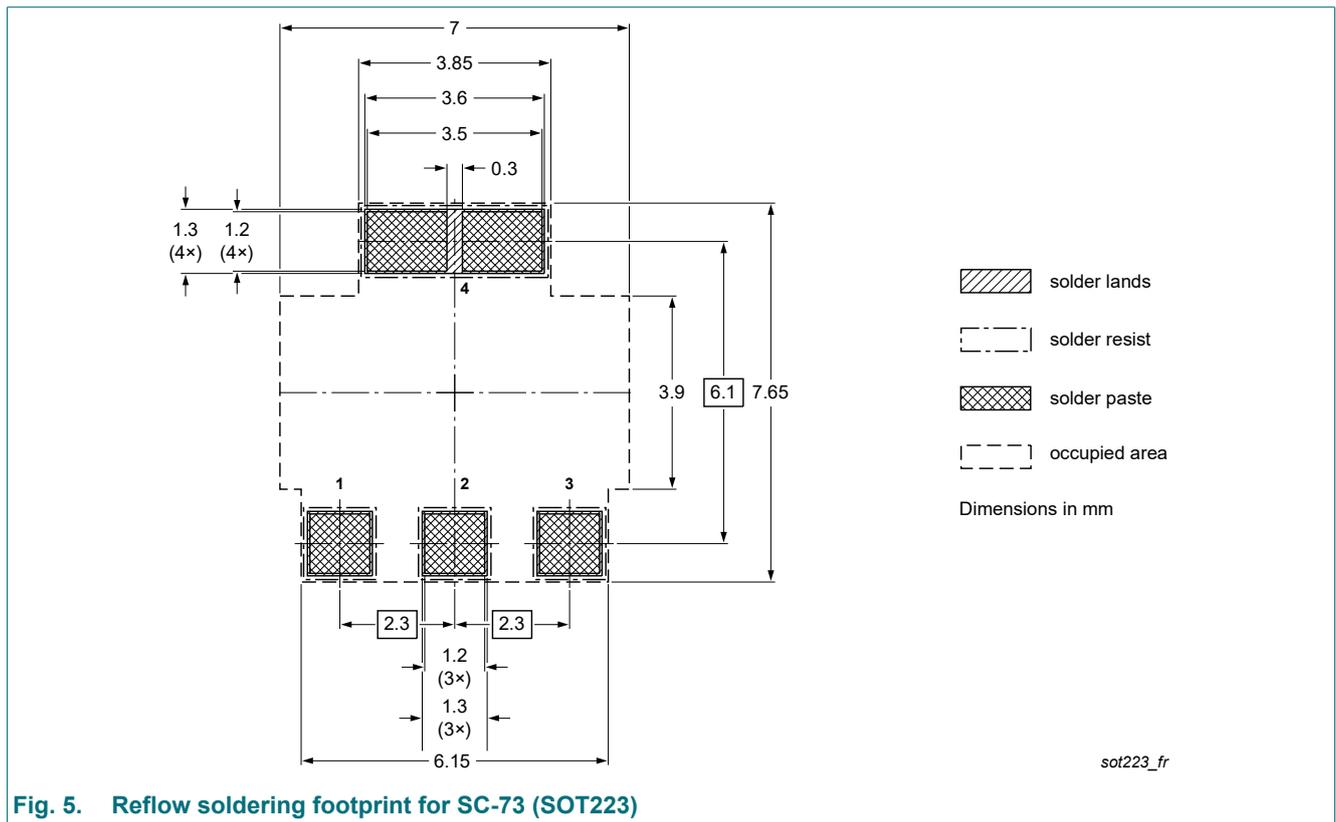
Reflow soldering footprint for SC-73 (SOT223)
